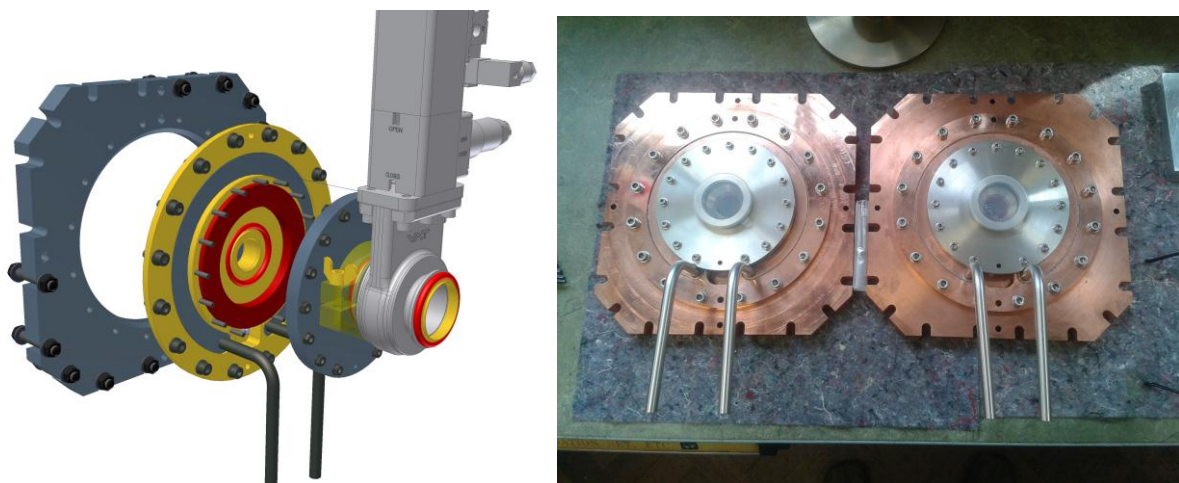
, Exploded CAD model of RFQ end flange and photograph of built and assembled units.
